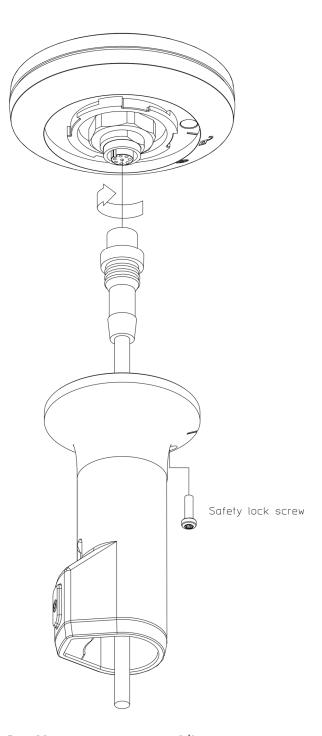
POLE MOUNT INSTALLATION STEP 4 (INTERNAL ROUTING OF THE COMMUNICATION CABLE)
